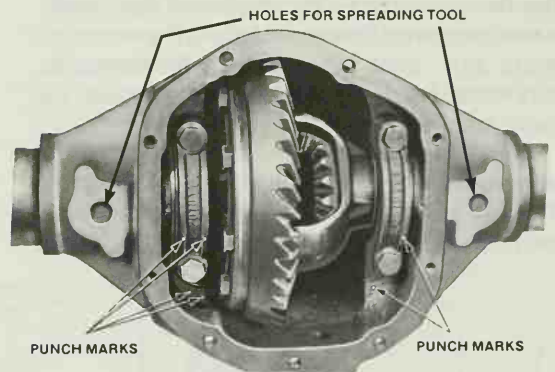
Punch marks on the bearing caps and housing will show reassembly in the correct position. (Chrysler Corporation)
